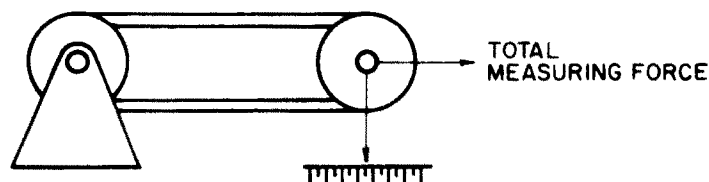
DIAGRAM OF A FIXTURE FOR MEASURING V-RIBBED BELTS
